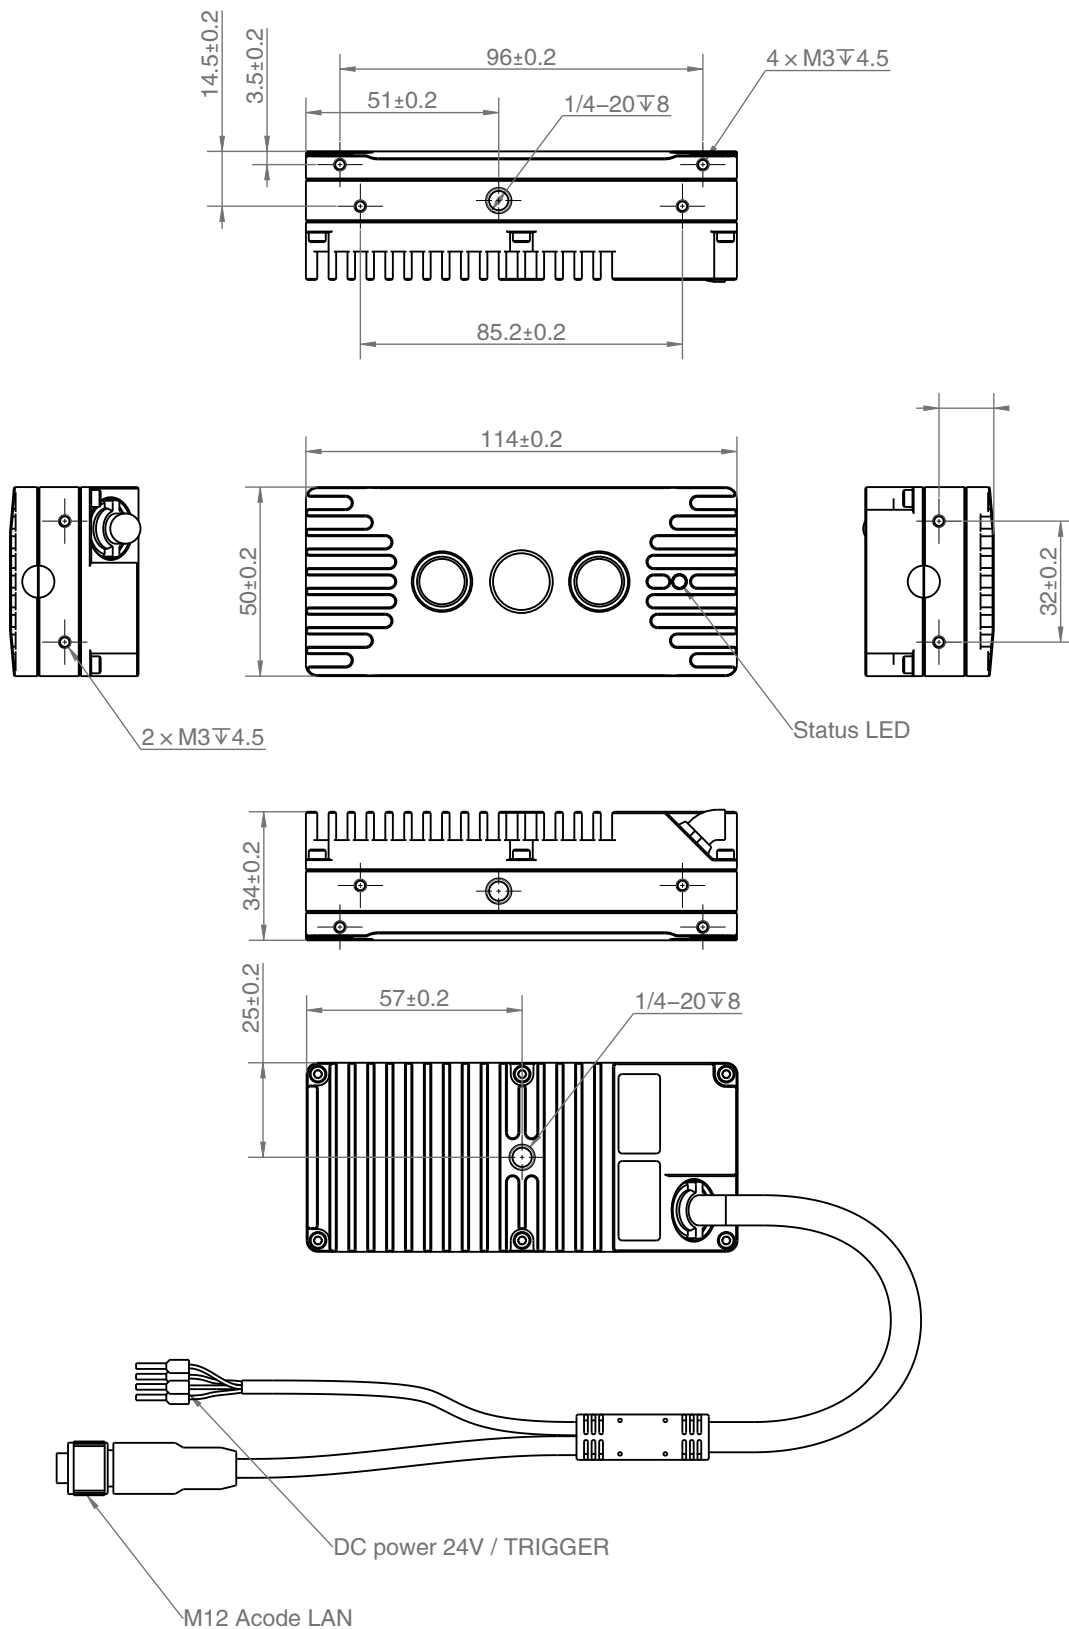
TM421-E1 Mechanical dimensions (unit: mm)
